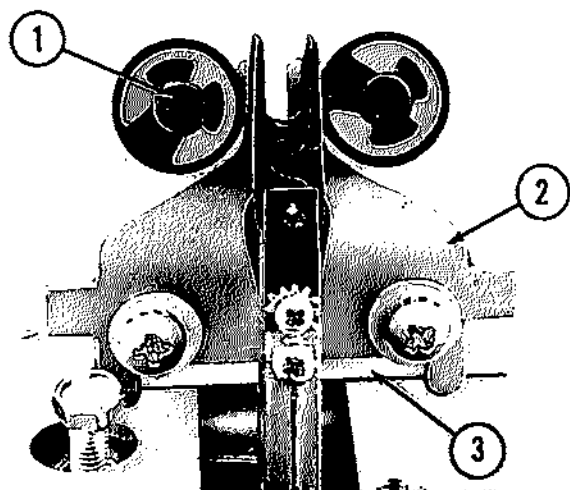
BRACKET AND ROLLER GUIDE ASSEMBLY,
